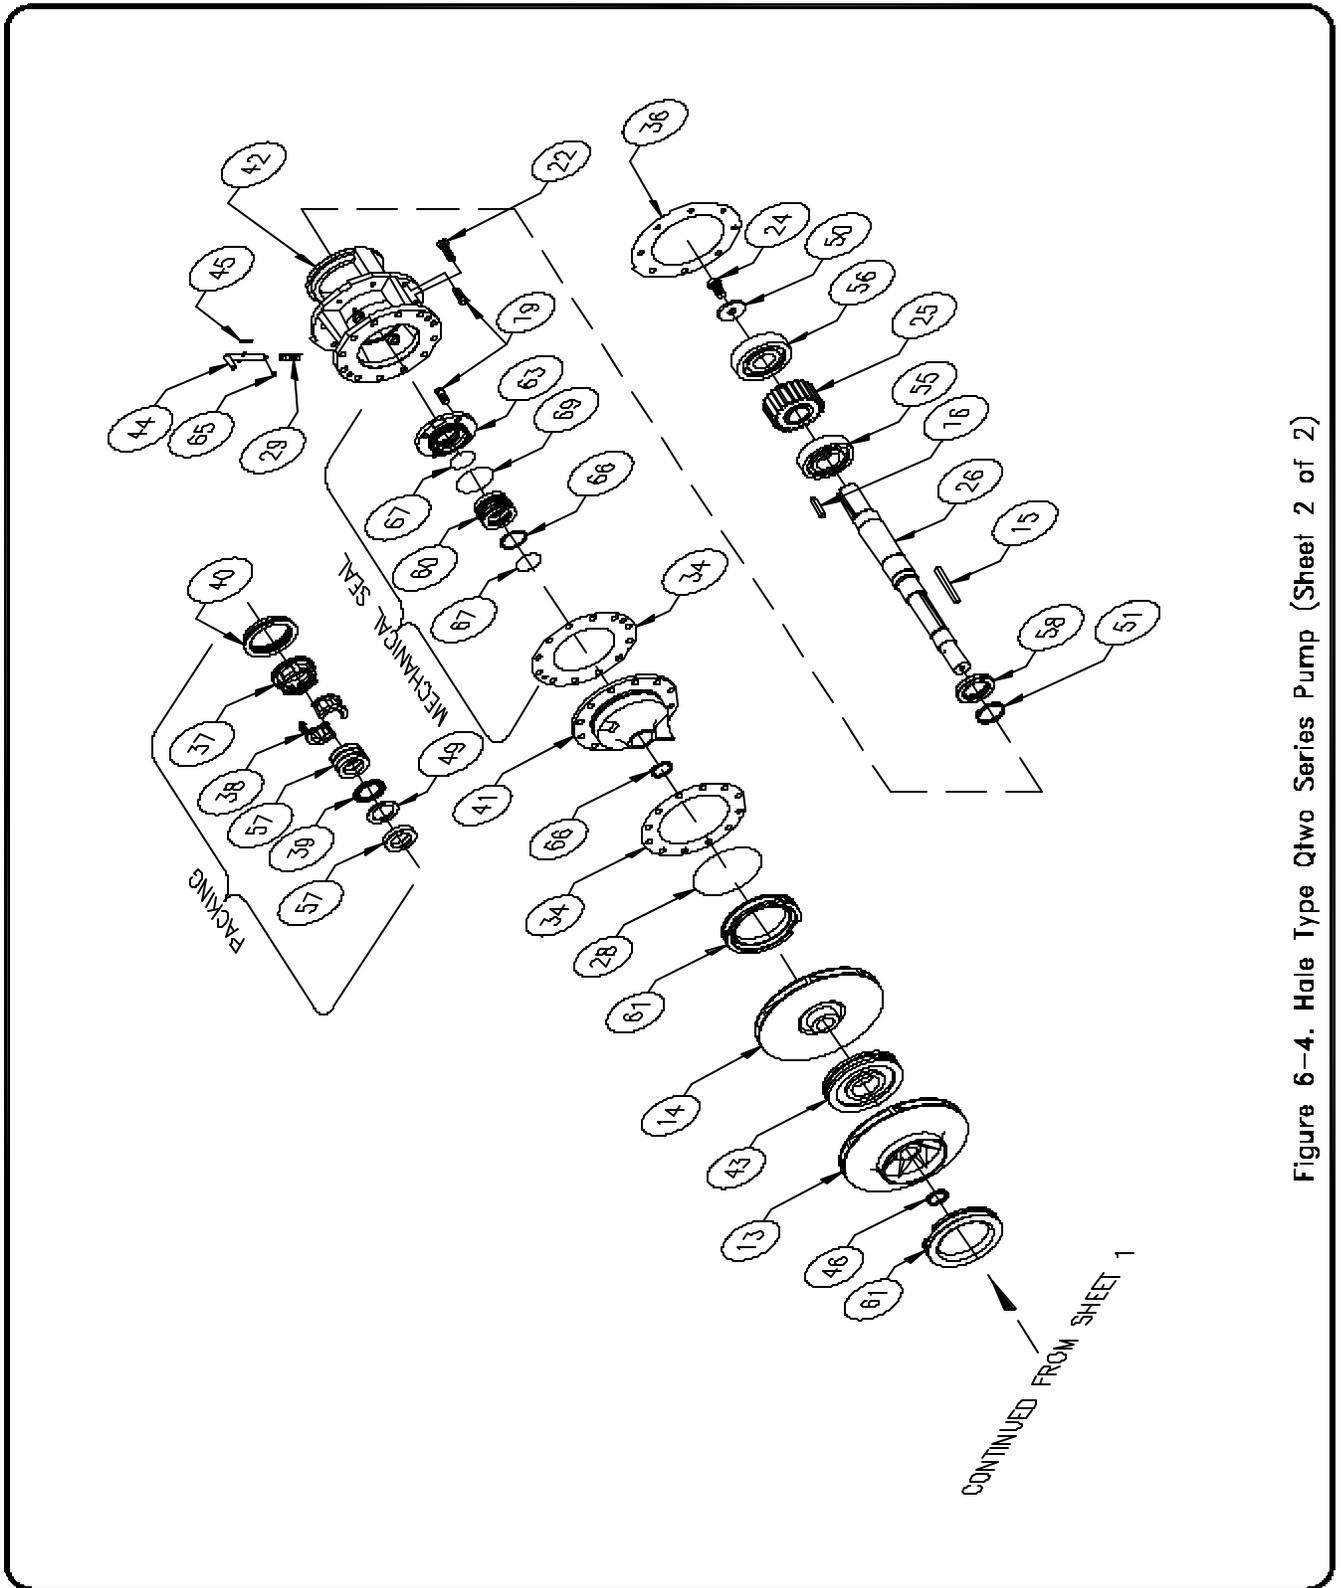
Hale Type Qtwo Series Pump (Sheet 2 of 2)
